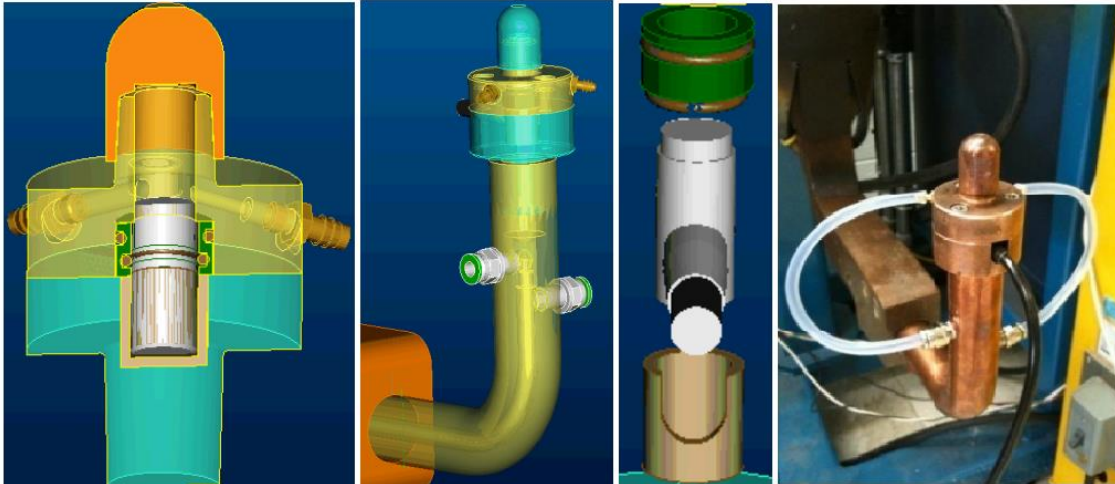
The prototype design can be seen on the left while the image on the right shows the final assembly. (Lui, 2012, Fig. 3.4.2 and 3.4.4)¹⁷
